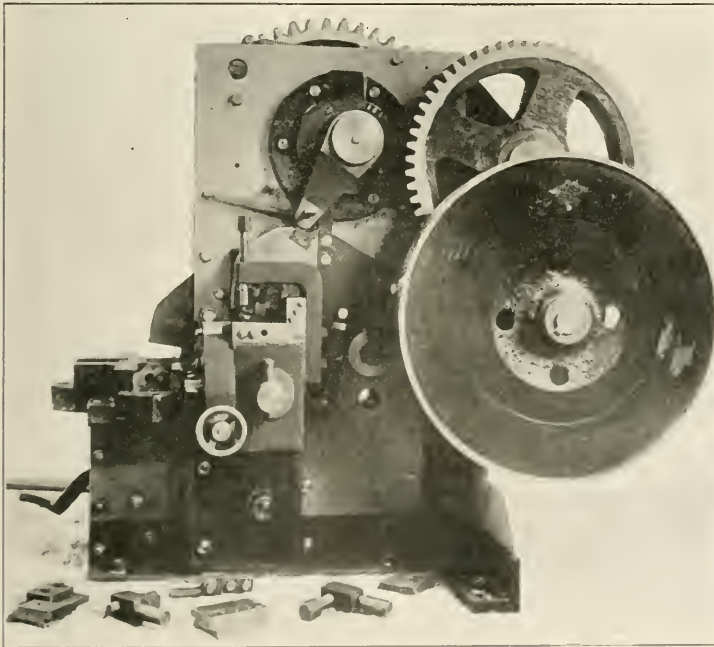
Pels Coping Machine for Blocking Out Steel Beams and Channels
